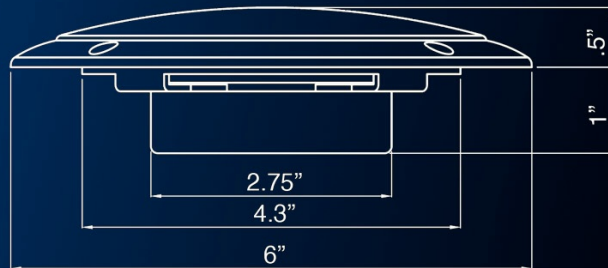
Technical diagram illustrating the dimensions and cutout requirements for the Magnadyne WR50B speakers.
